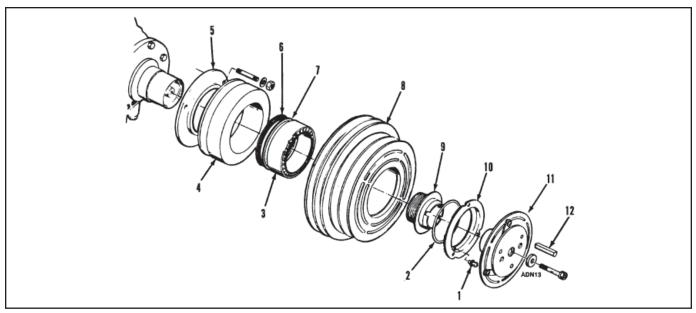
Clutch Assembly - 8.0 in., 9.0 in and 9.0/10 in. Diameter Pulley
